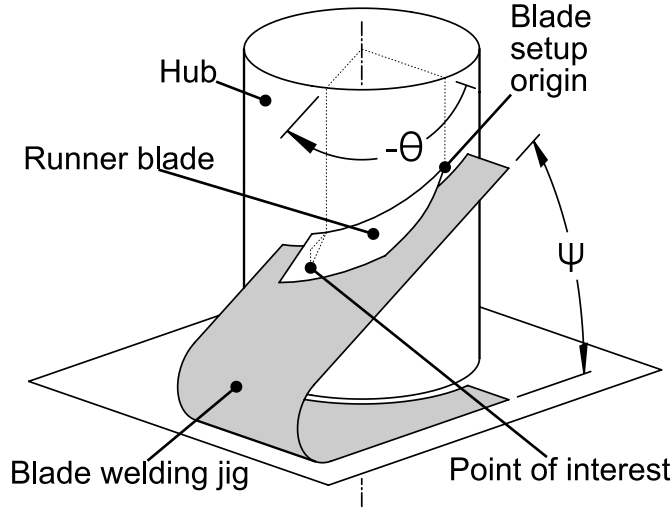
Runner blade assembly setup, showing that when the blade is welded in place, the blade setup origin corresponds to  $\theta = 0$ , where dihedral is zero
